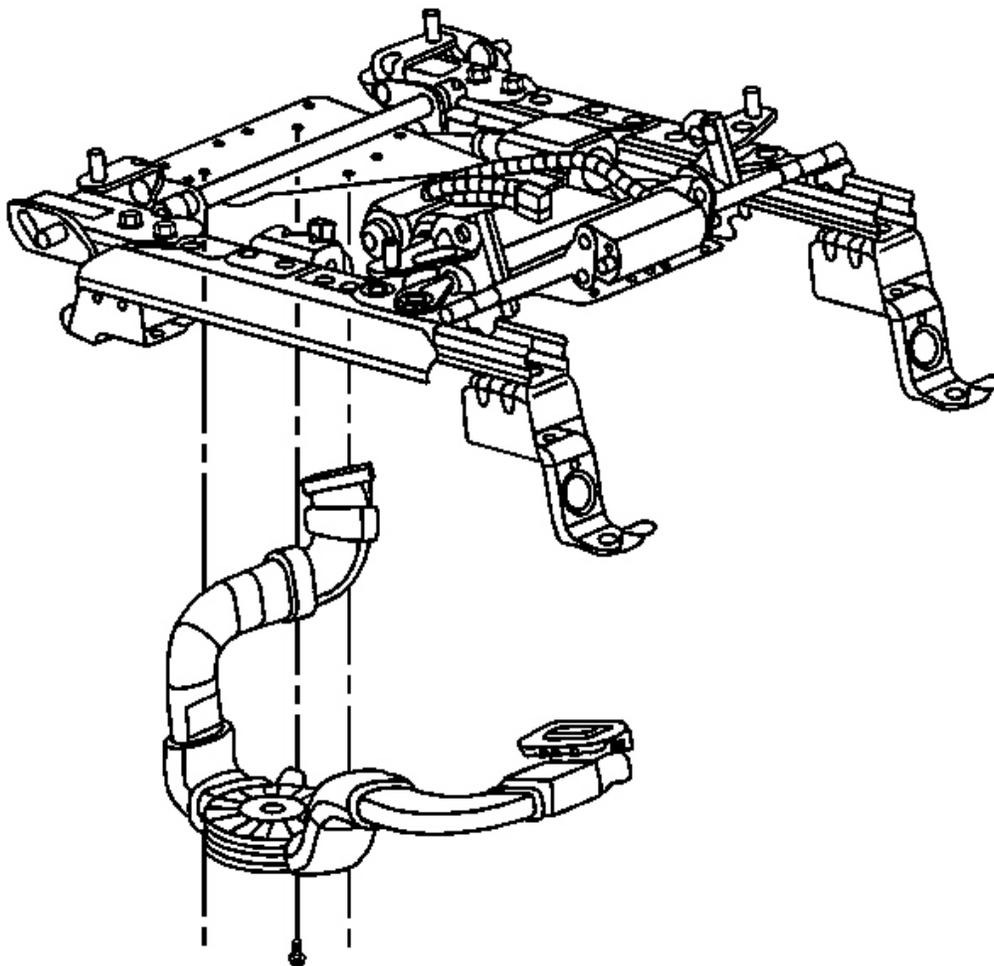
View Of Blower Assembly & Screws - Passenger Seat
